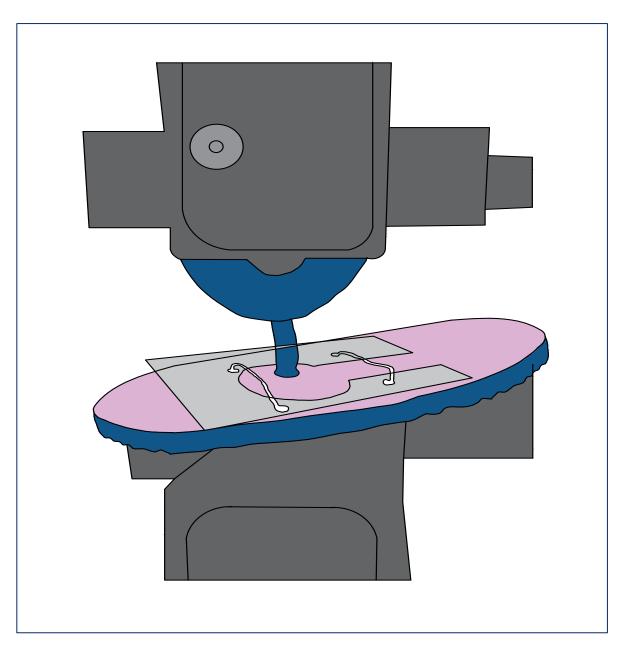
ILLUSTRATION DIAGRAM FOR CLAMPING OF TOE POST STRAP IN THE TENSILE MACHINE
